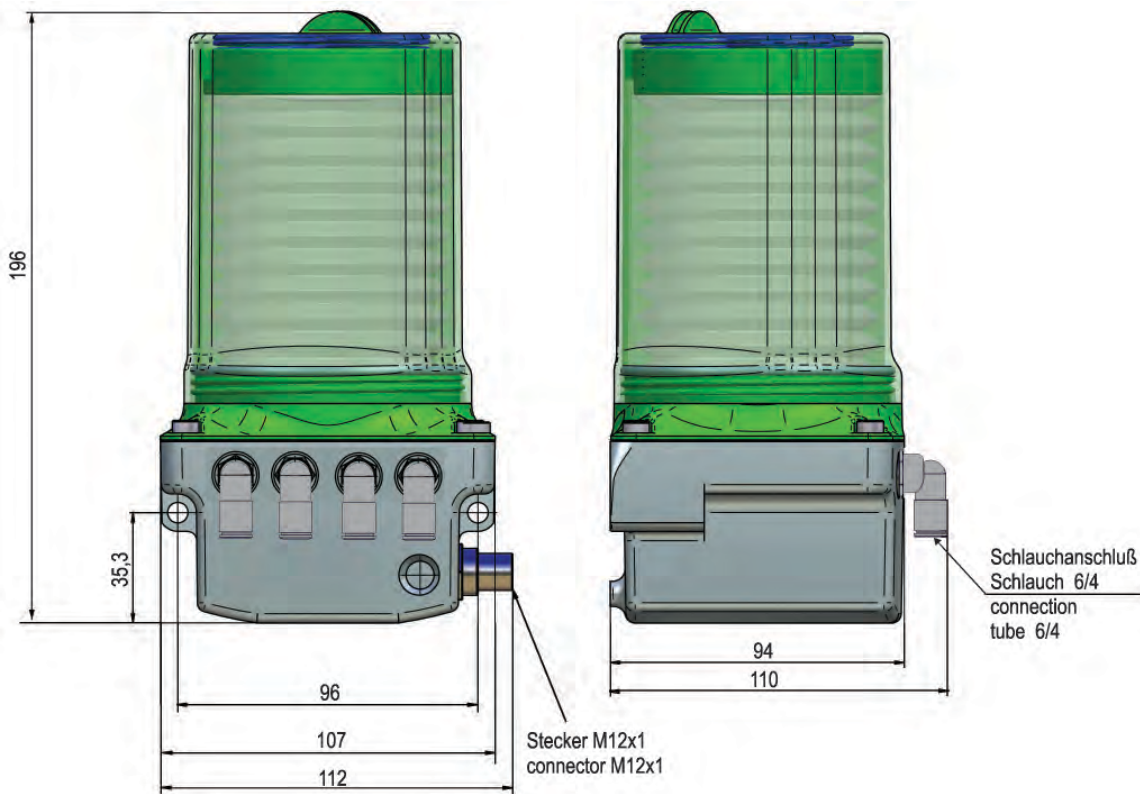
Dimensions FlexxPump 400 DLS, pulse-controlled; up to 4 outlets
